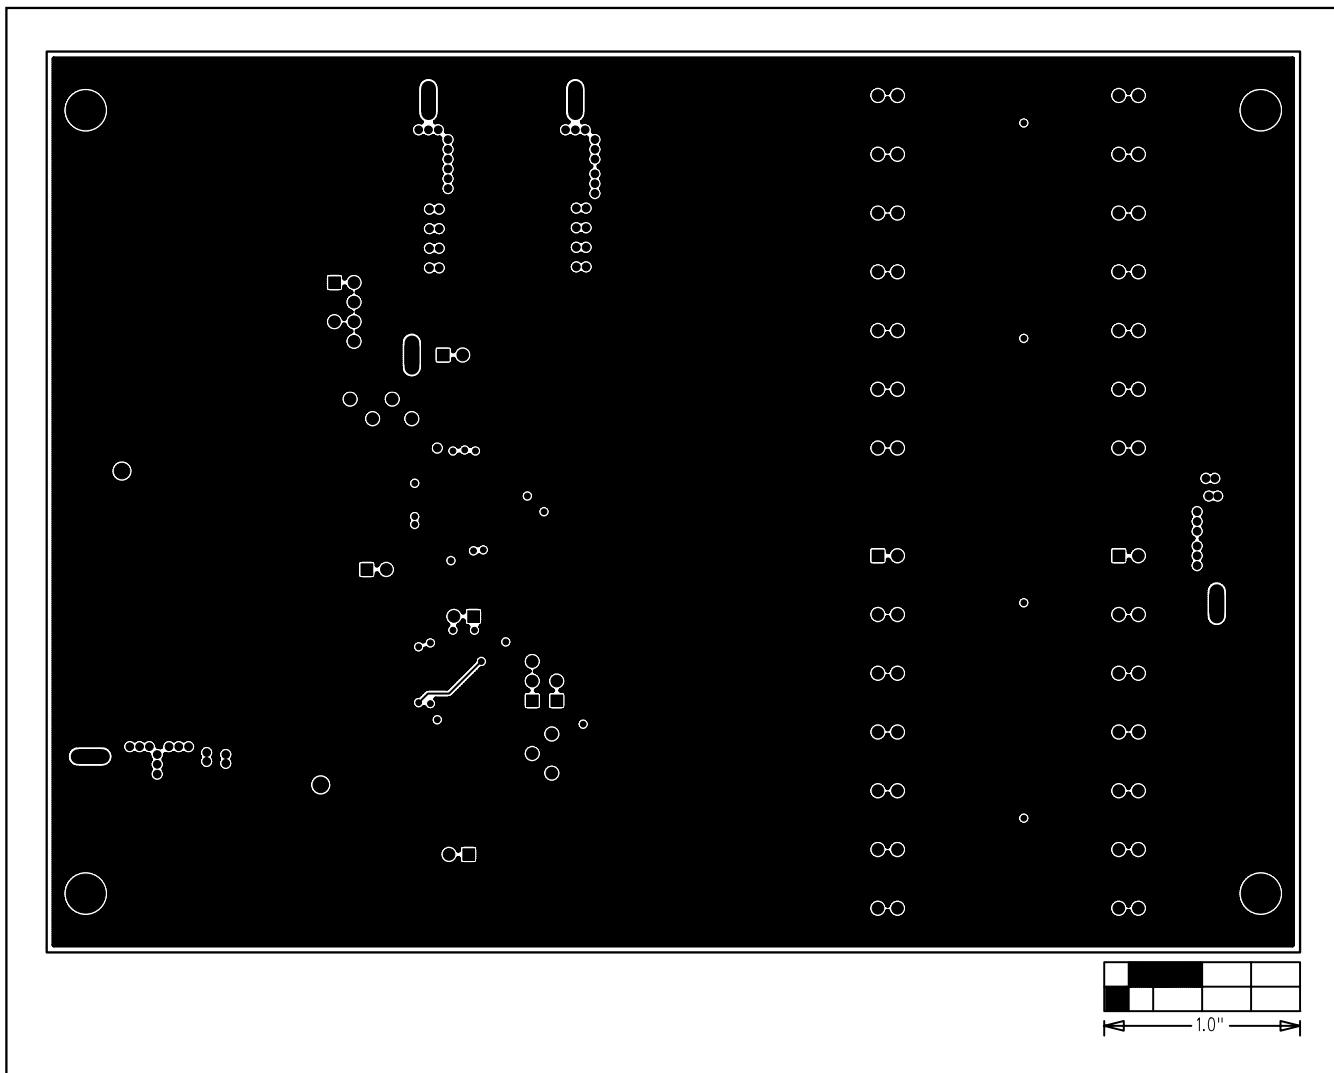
MAX1213N/MAX1214N EV Kit PC Board Layout—Solder Side
